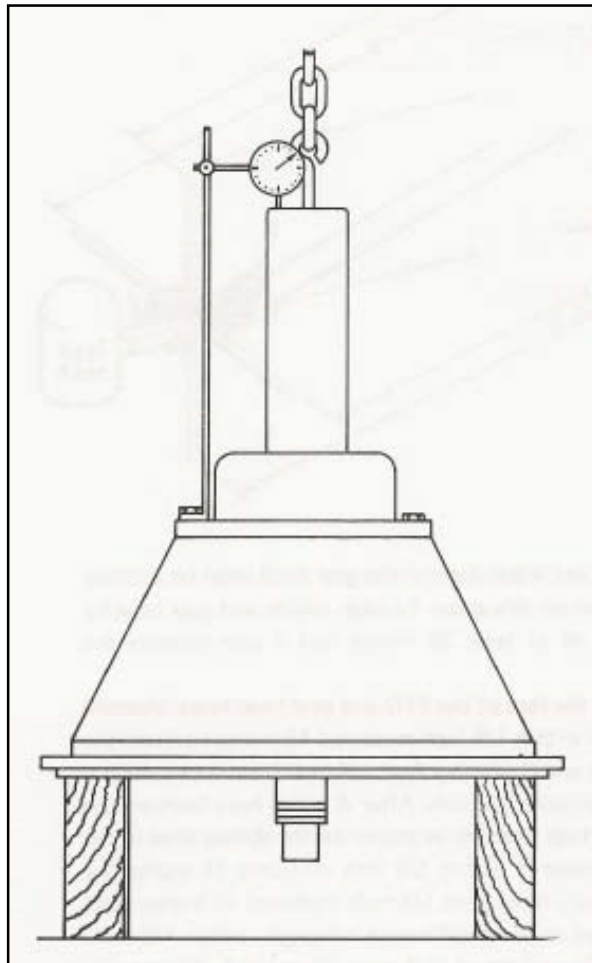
Dial indicator and power take-off position for measuring and setting bearing end play.
